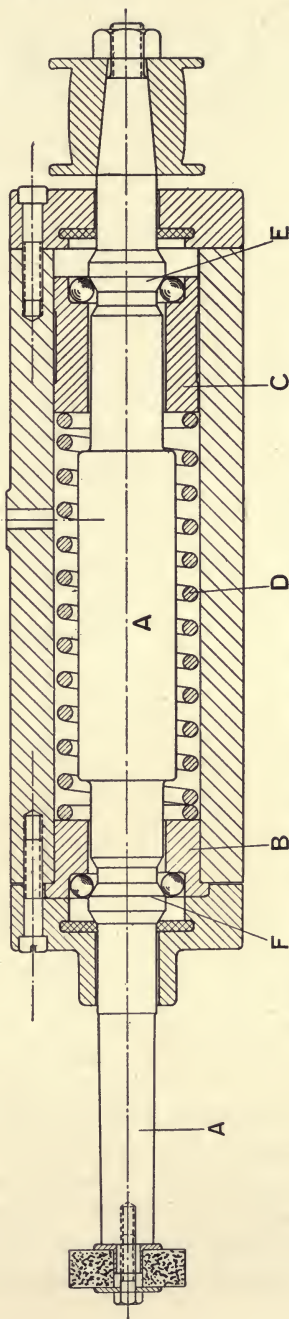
GUEST INTERNAL GRINDING SPINDLE (BALL BEARING TYPE)
